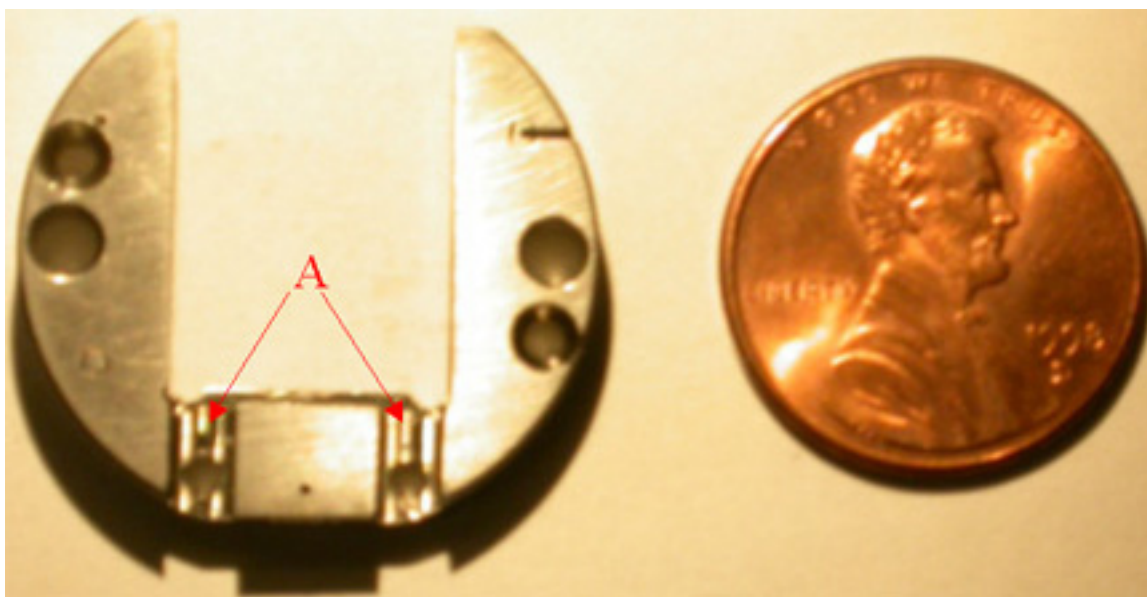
Bottom view of bottom section of the sample stage reveals two depressions with 2-56 tapped holes for fashioning leaf spring electrical contacts for the button sample heater in the sample holder.
